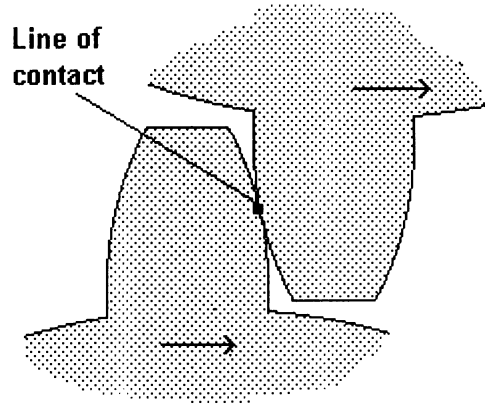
Gear teeth moving to the right with the lower tooth driving the upper one. Contact begins near the root of the lower tooth and progresses upward to the tip of that tooth.
